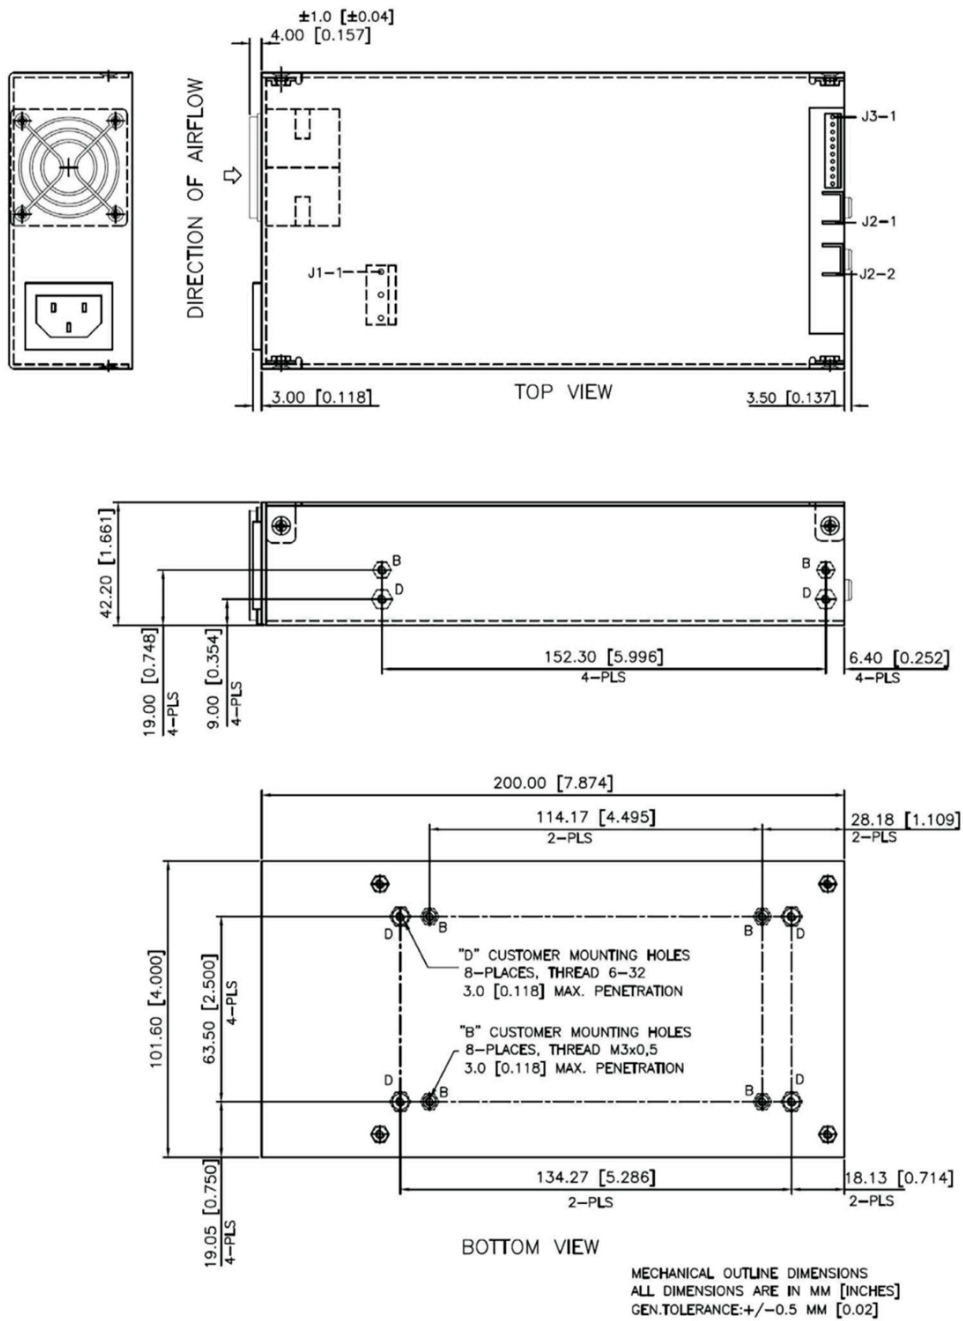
Mechanical Drawing (With Side Fan Mounting)
